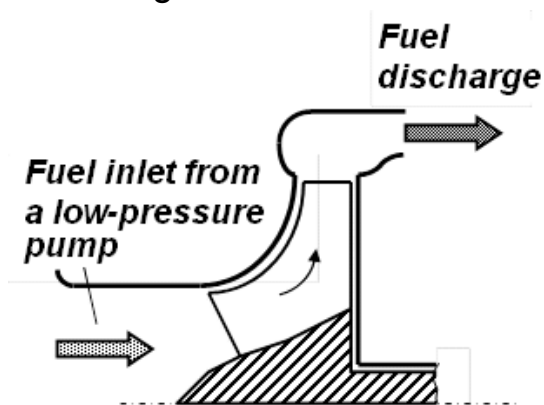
Scheme of centrifugal high pressure fuel pump with open impeller
